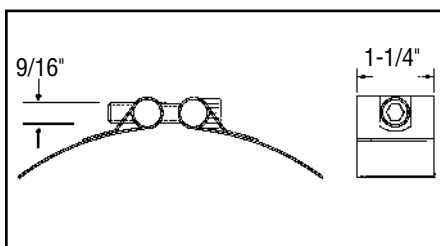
Wide Barrel — 1-1/4" Wide Barrel Assembly Welded to Sheath with 5/16-18 Socket Head Screw
